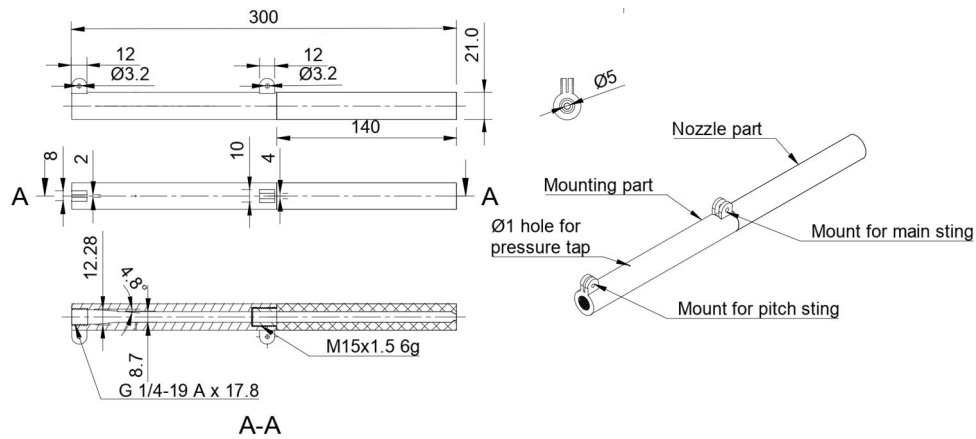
The drawing of the model final design (all dimensions are in mm)
